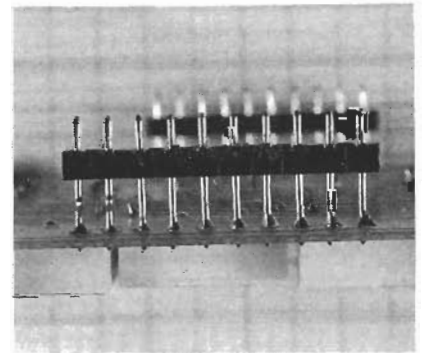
TEN-PIN HEADERS ARE INSERTED so longer pins enter the foil side and are flush with the component side of the display board.
